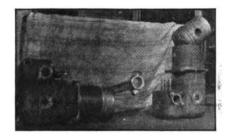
THE CYLINDERS, A PISTON AND CONNECTING-ROD END
